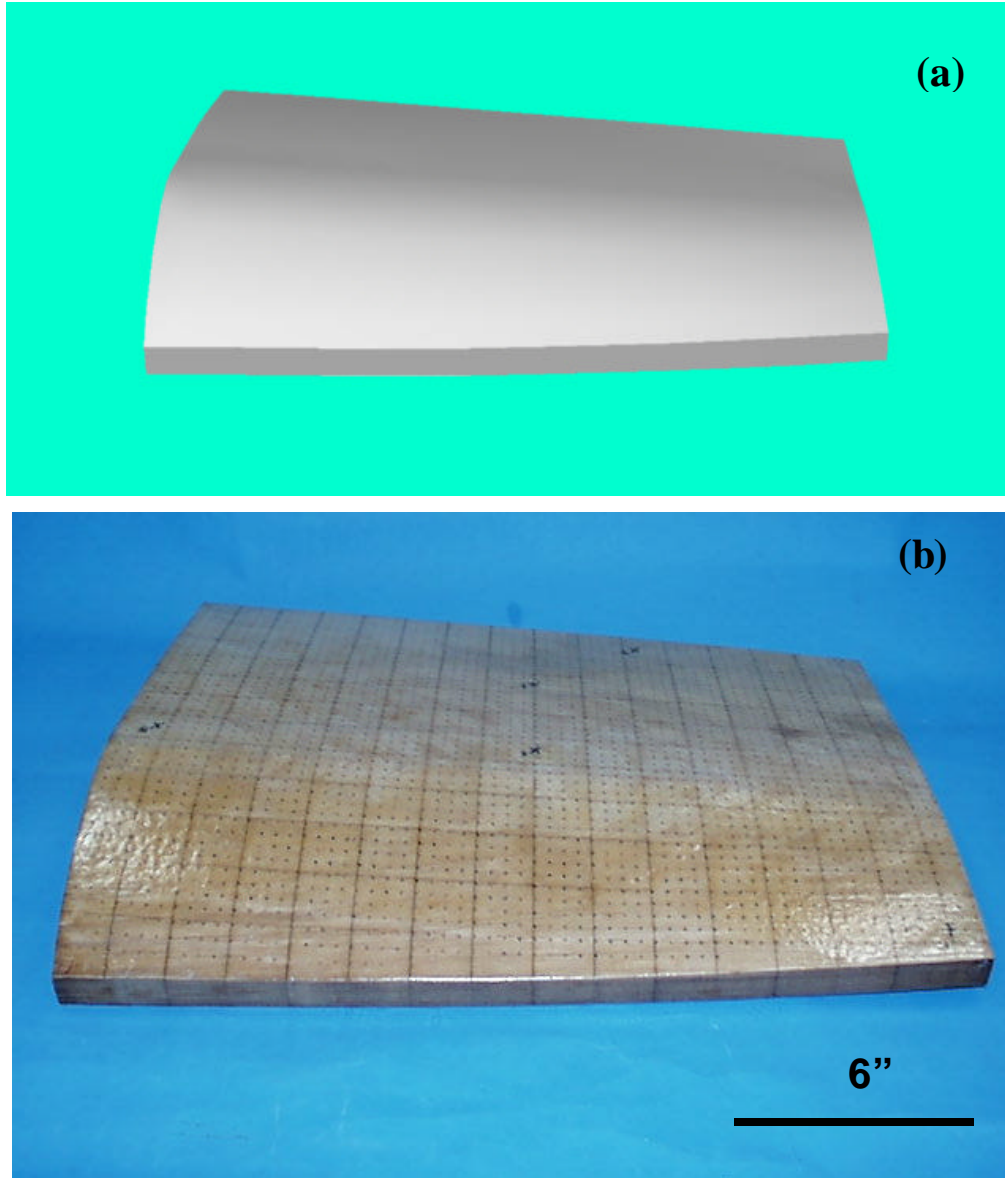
(a) 3D CAD model of LOM blastshield forming tool and (b) final resin infiltrated part.
